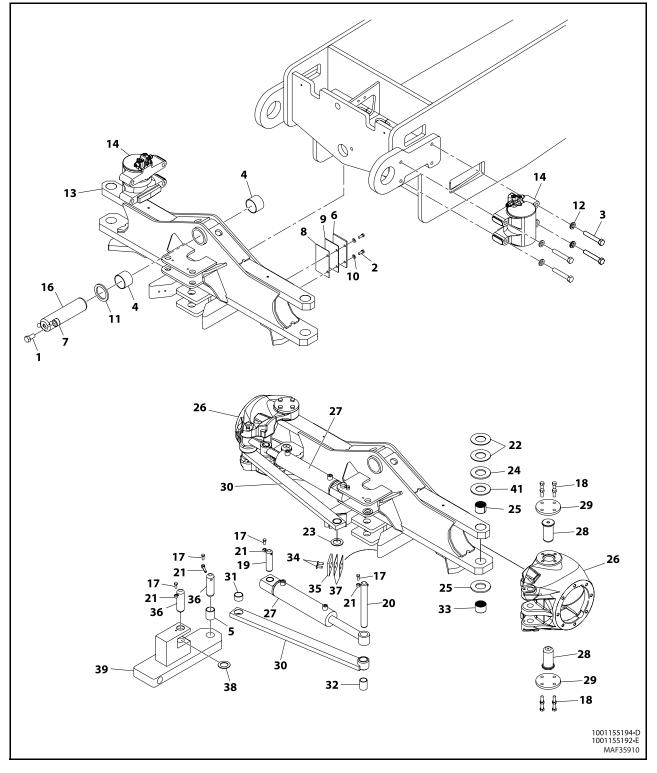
Axle and Steering Installation with Tow Package- Sheet 1 of 2
